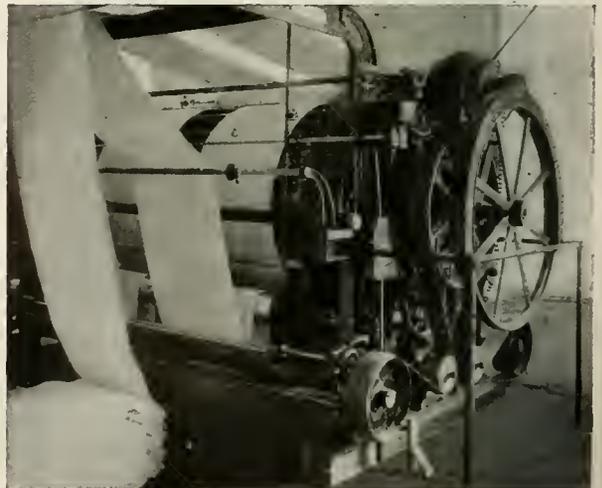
Enclosed Induction Motor Geared to Napping Machine. Tremont & Suffolk Mills, Lowell, Mass.
